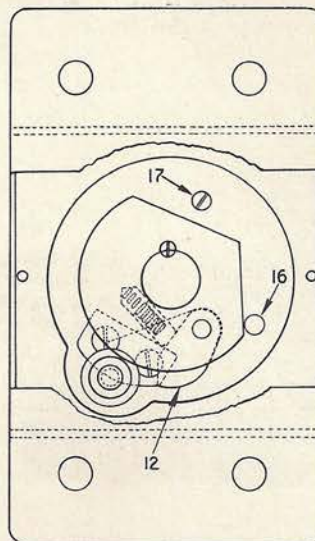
Bottom of Square Turret showing arrangement for converting into a hand indexed unit
